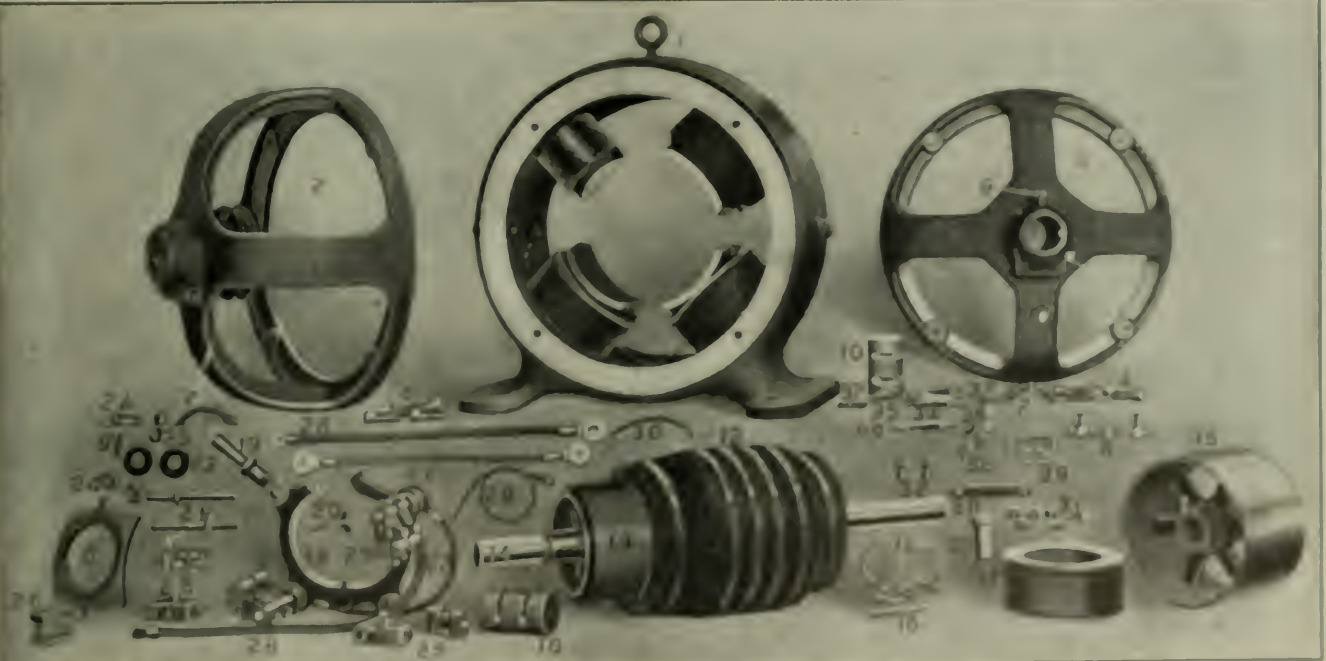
EXPLODED VIEW OF THE FORT WAYNE GENERATOR SHOWN IN FIG. 299
